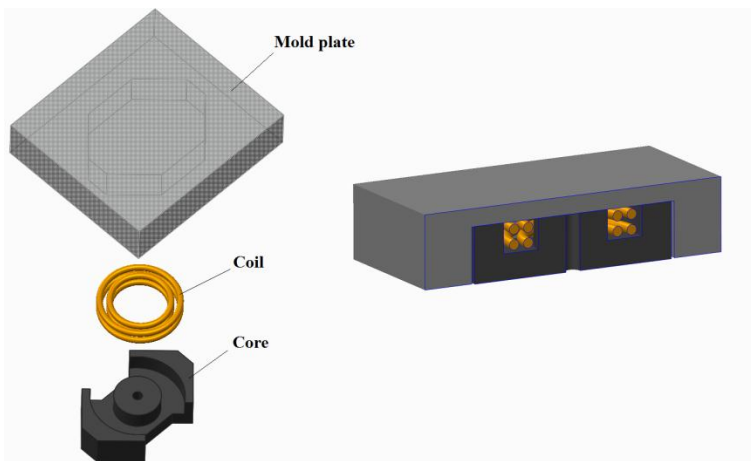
Left: Exploded view of the main parts in the mold with the build-in inductor. Right: Cross section of the mold with the cavity side up, where the molten polymer will flow.
